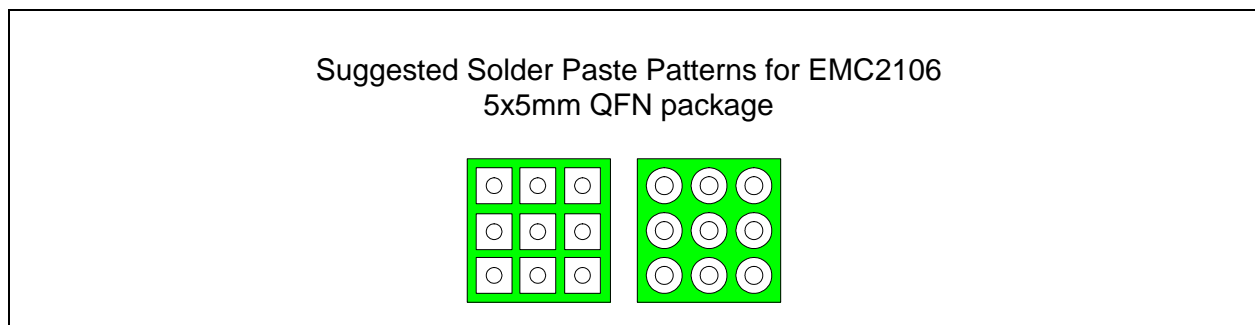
Suggested Solder Paste Patterns for EMC2106 5x5mm QFN package
